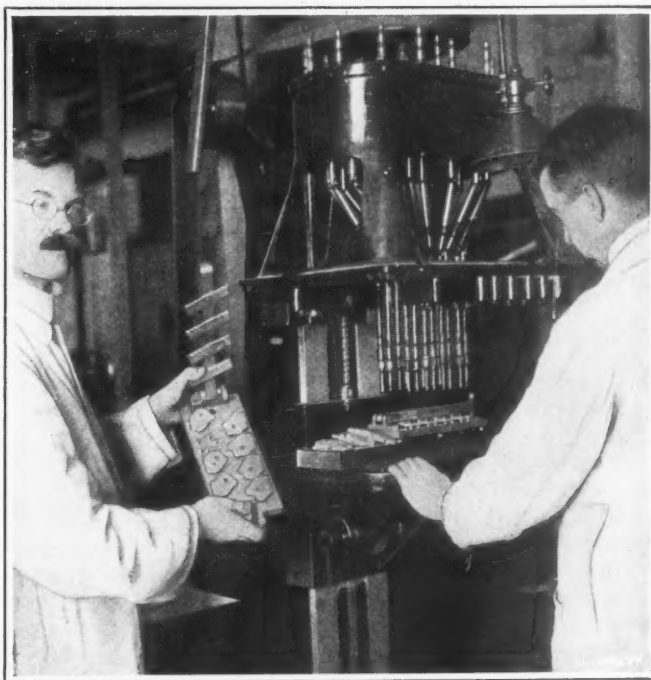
Counterboring on a Multiple Spindle Drilling Machine
